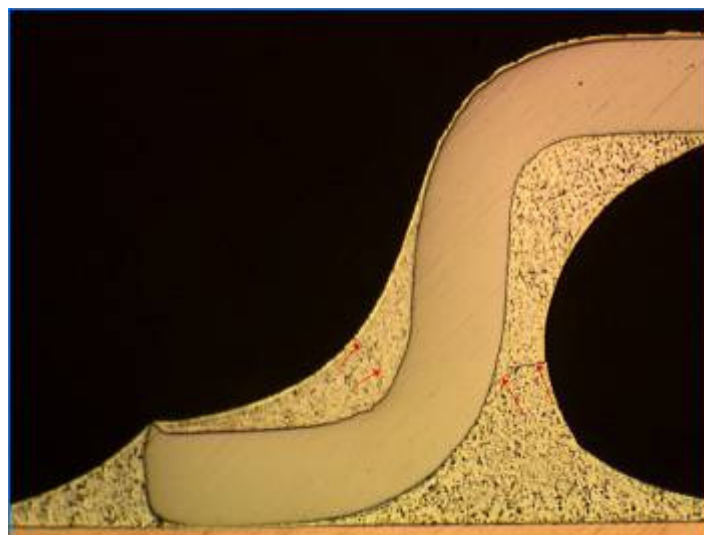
cross section, SN61, U62, left lead, solder crack, 100x
